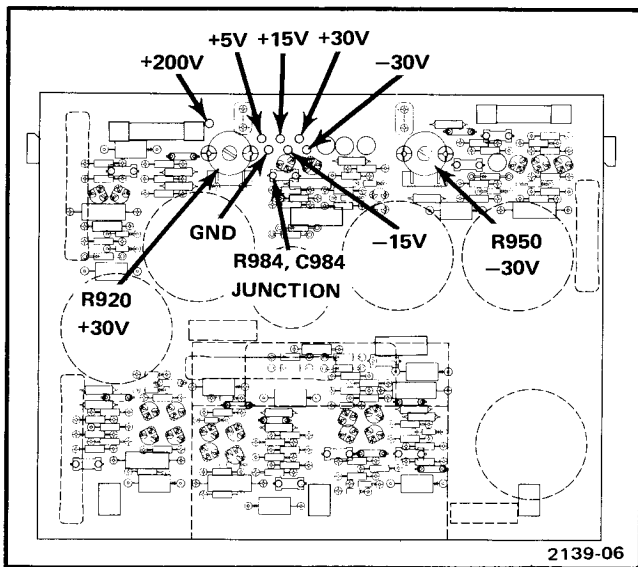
Location of power supply test points and -30, +30-volt adjustments.
